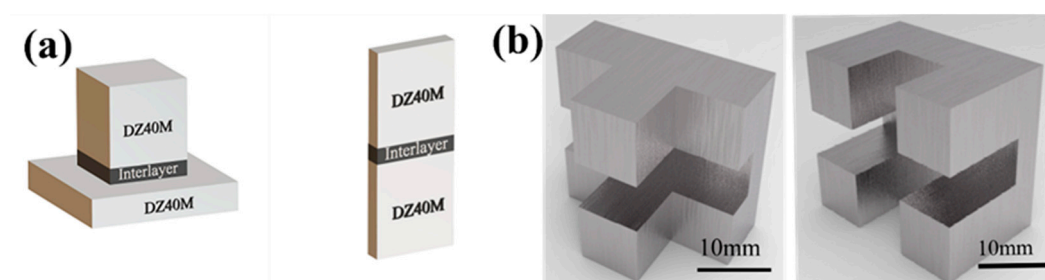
(a) Sketches of the assemblies sample, (b) Graphite fixture for fixing sample.
